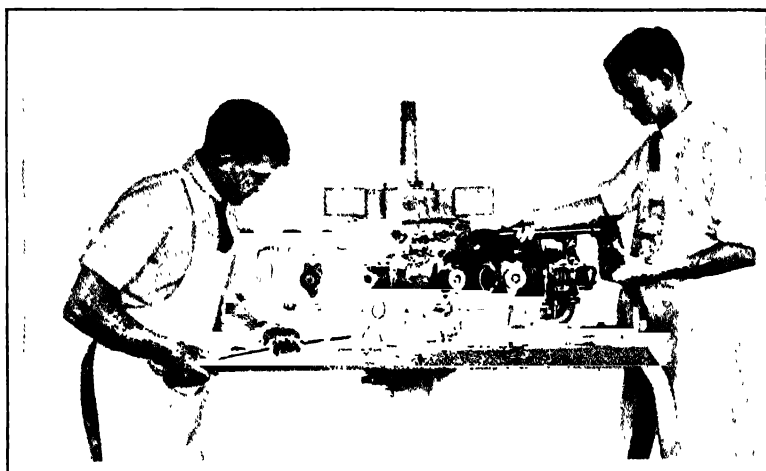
Assembling Intake Pipes and Valve Gear Housings on Wright Model J5 Engine Using Tool WA-225.
